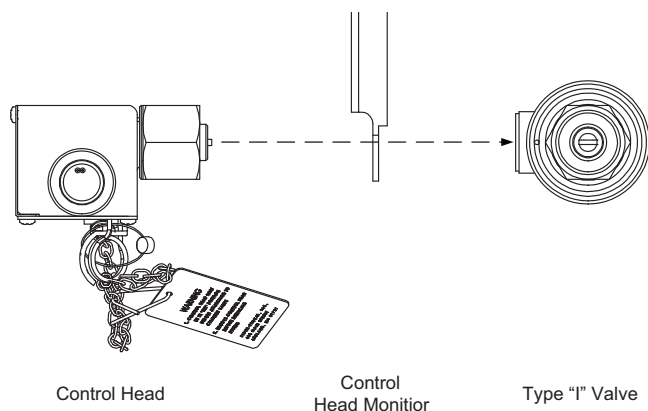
Control Head and Placements Supervision Component Installation to Type "I" Valve, Top View
